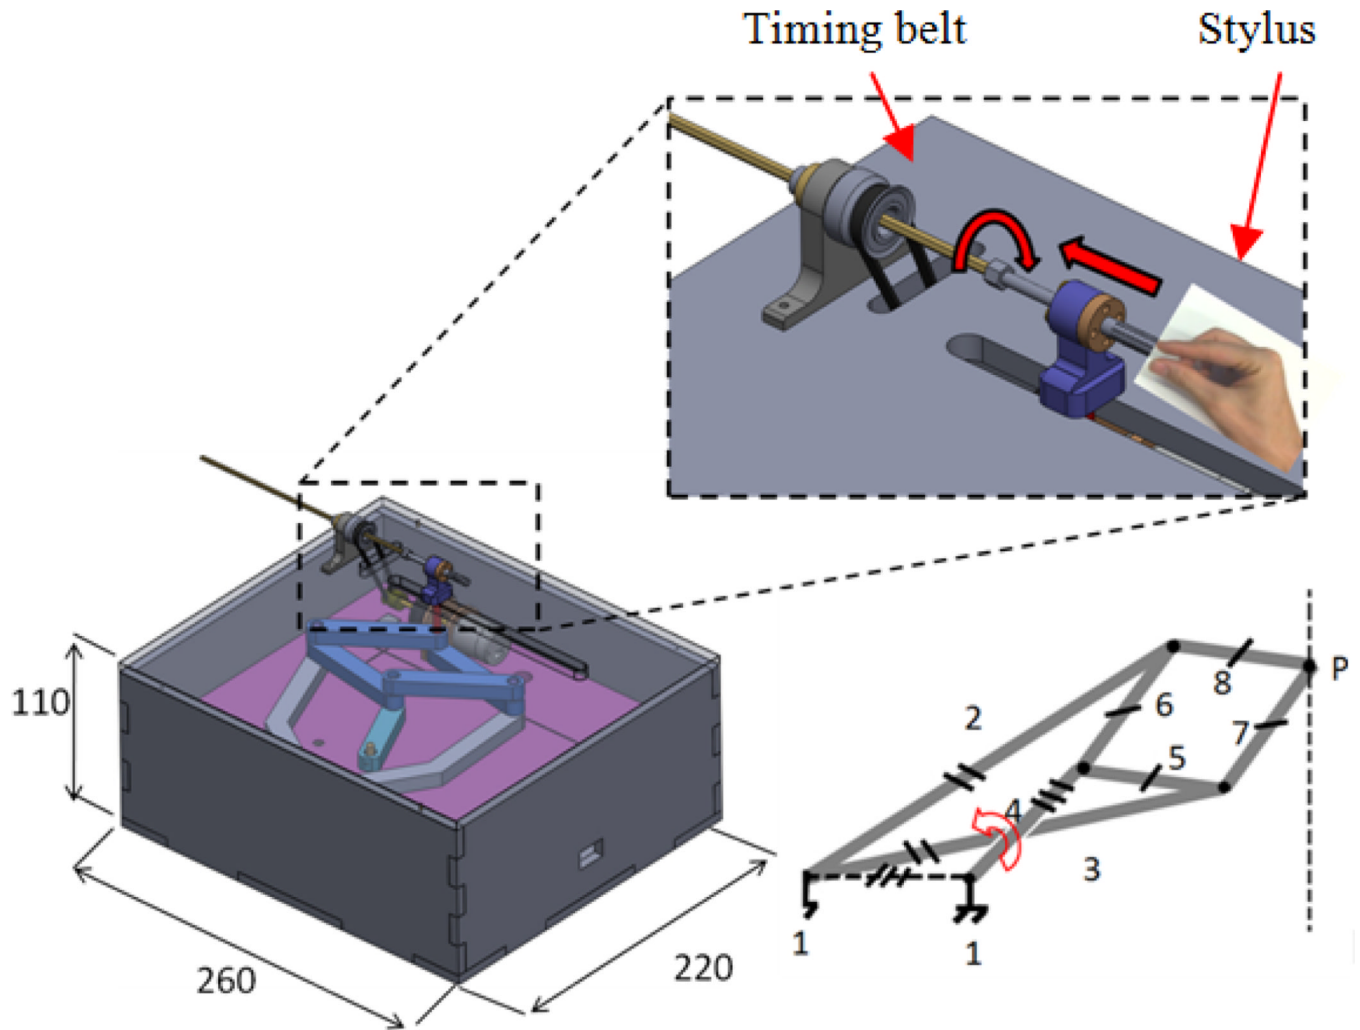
CAD design of the master robot: Peaucellier-Lipkin mechanism is employed to convert rotary motion of motor to perfect linear motion.
